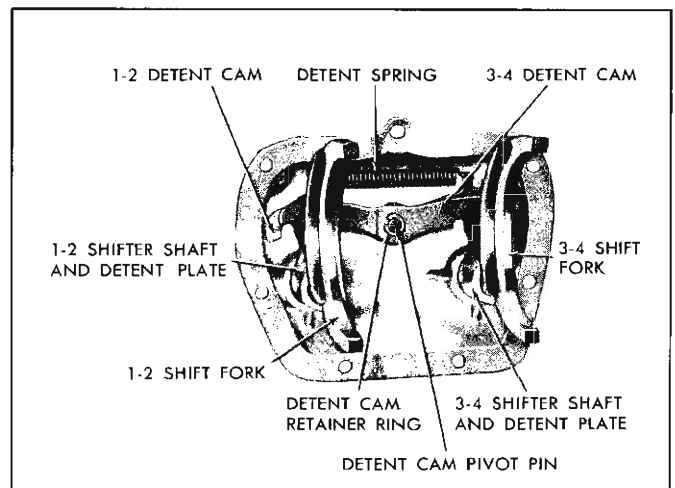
M—Transmission Side Cover, Shift Fork and Detent Assembly
